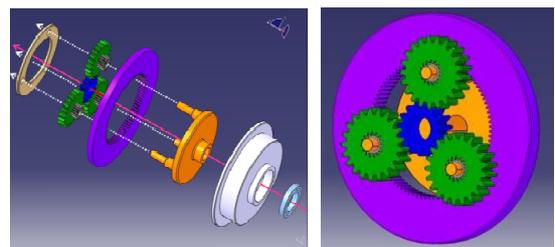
Designed reduction-gear set by using the 3D CAD modeling program
